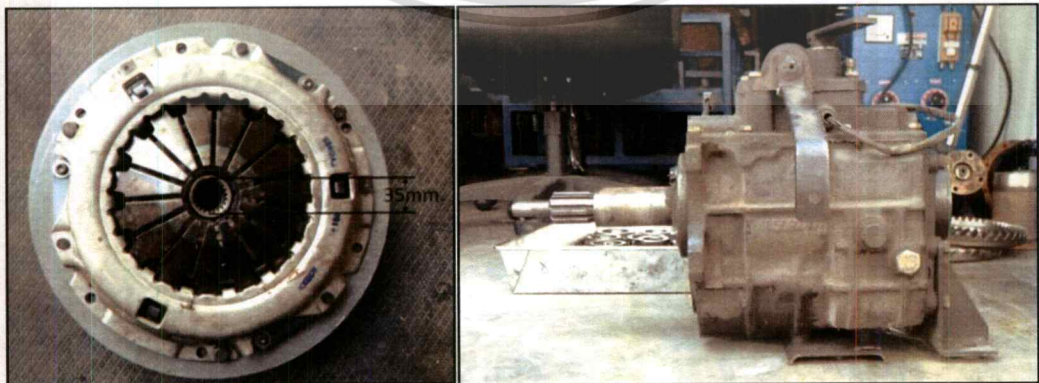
Difference in spline size and type between gearbox and clutch disc
